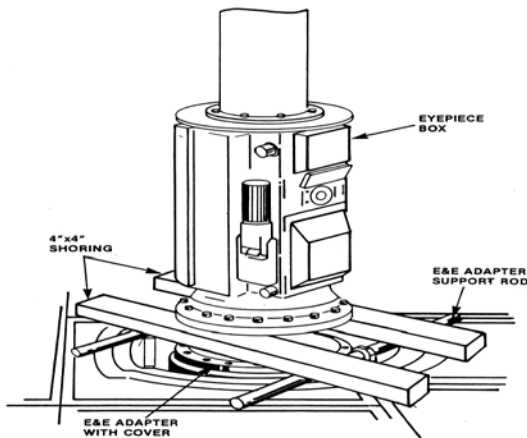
E&E Adapter and Eyepiece Box, Well Installation/Removal Positioning
